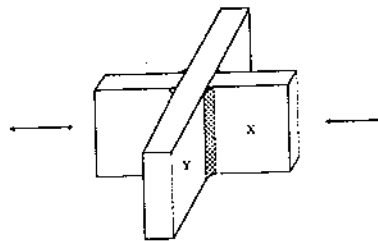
UKDEn Load Carrying Fillet and T Butt Weld 1
